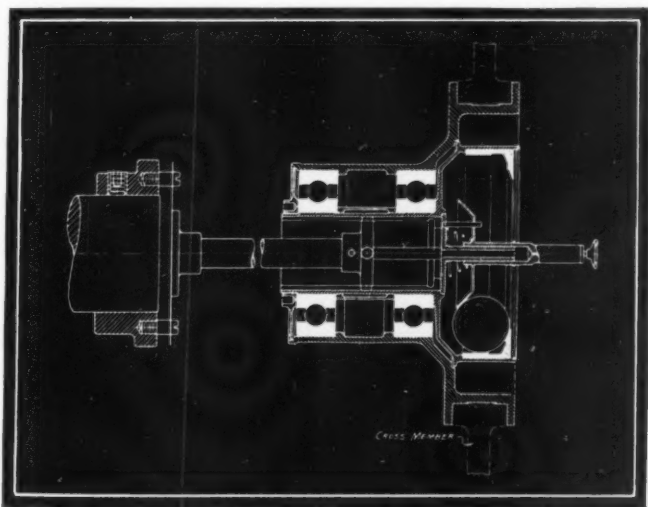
Balancing head carried in its own bearings for mounting in separate cradle member
